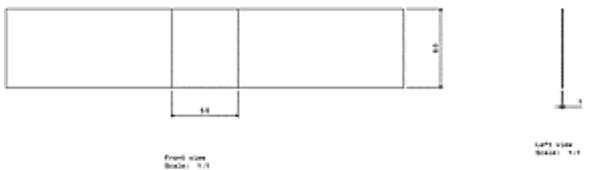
Figure Drafting view of aluminum sheet plate without crack & patch
